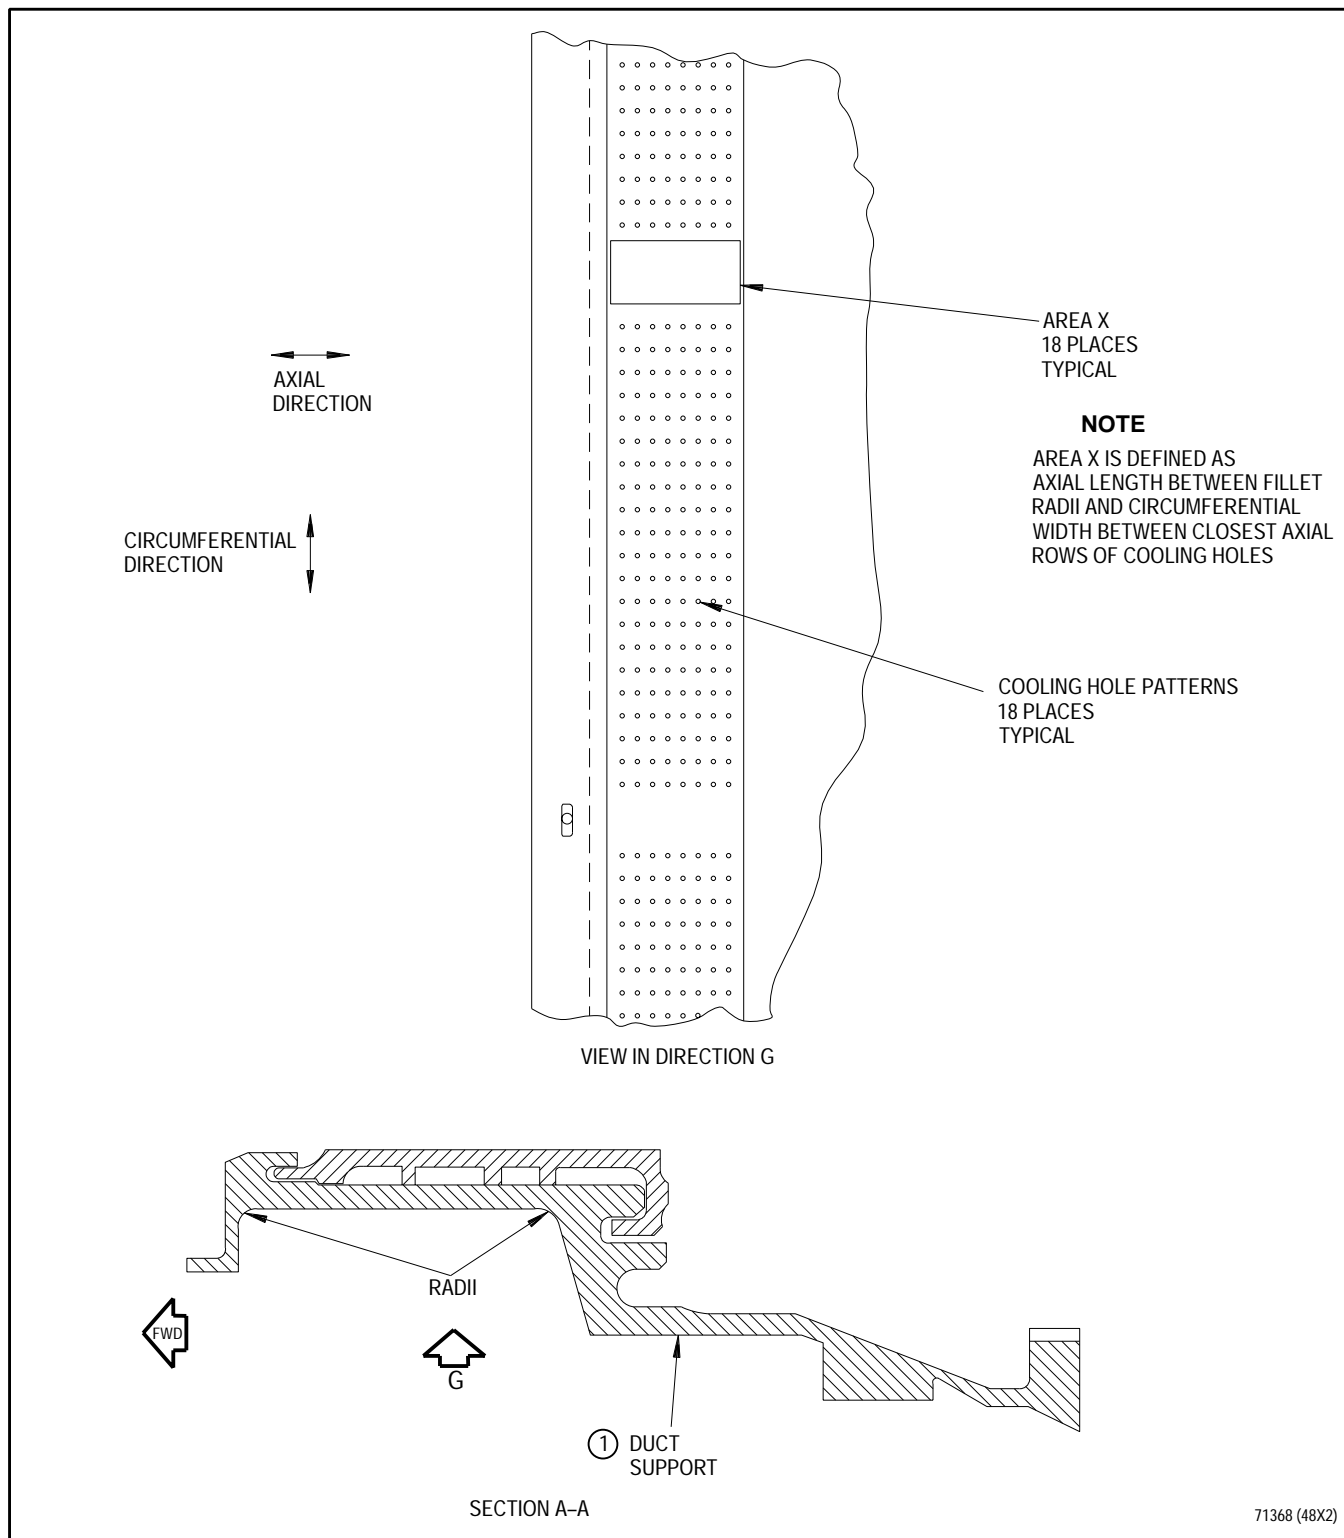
First Stage Turbine Duct and Support Set - Inspection (Sheet 2 of 2)
